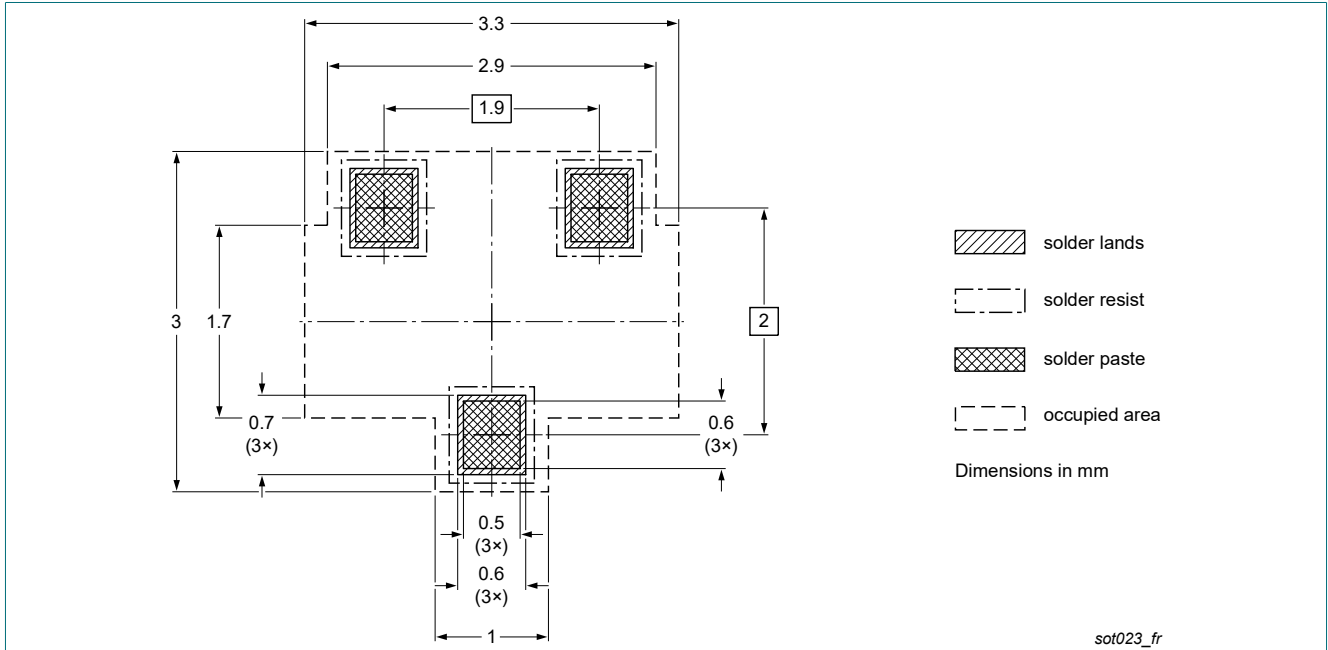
Reflow soldering footprint SOT23 (TO-236AB)
